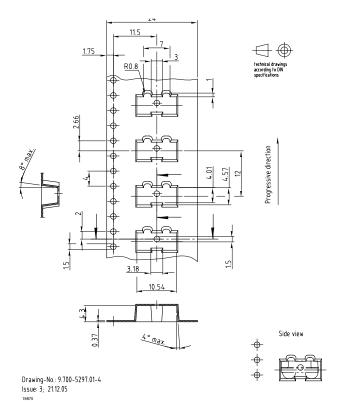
Tape for 4.0 - mm Package Side View Oriented
